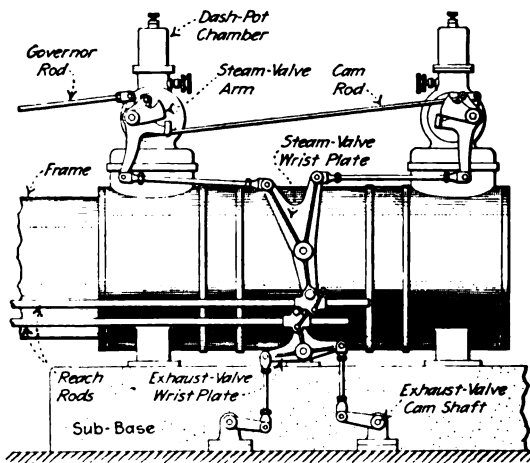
Poppet-valve operating mechanism of Vilter engines. (Note that this engine employs the usual double-eccentric Corliss-valve trip gear for operating the poppet valves.)
